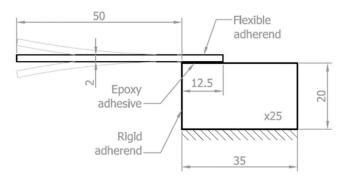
Shape and dimensions (in mm) of adhesive joint samples used in fatigue tests
